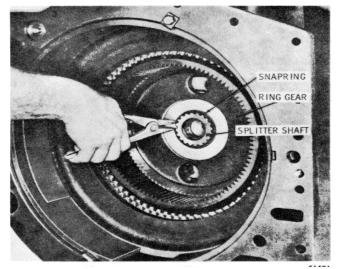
Removing Spliter Output Shaft Snap Ring
